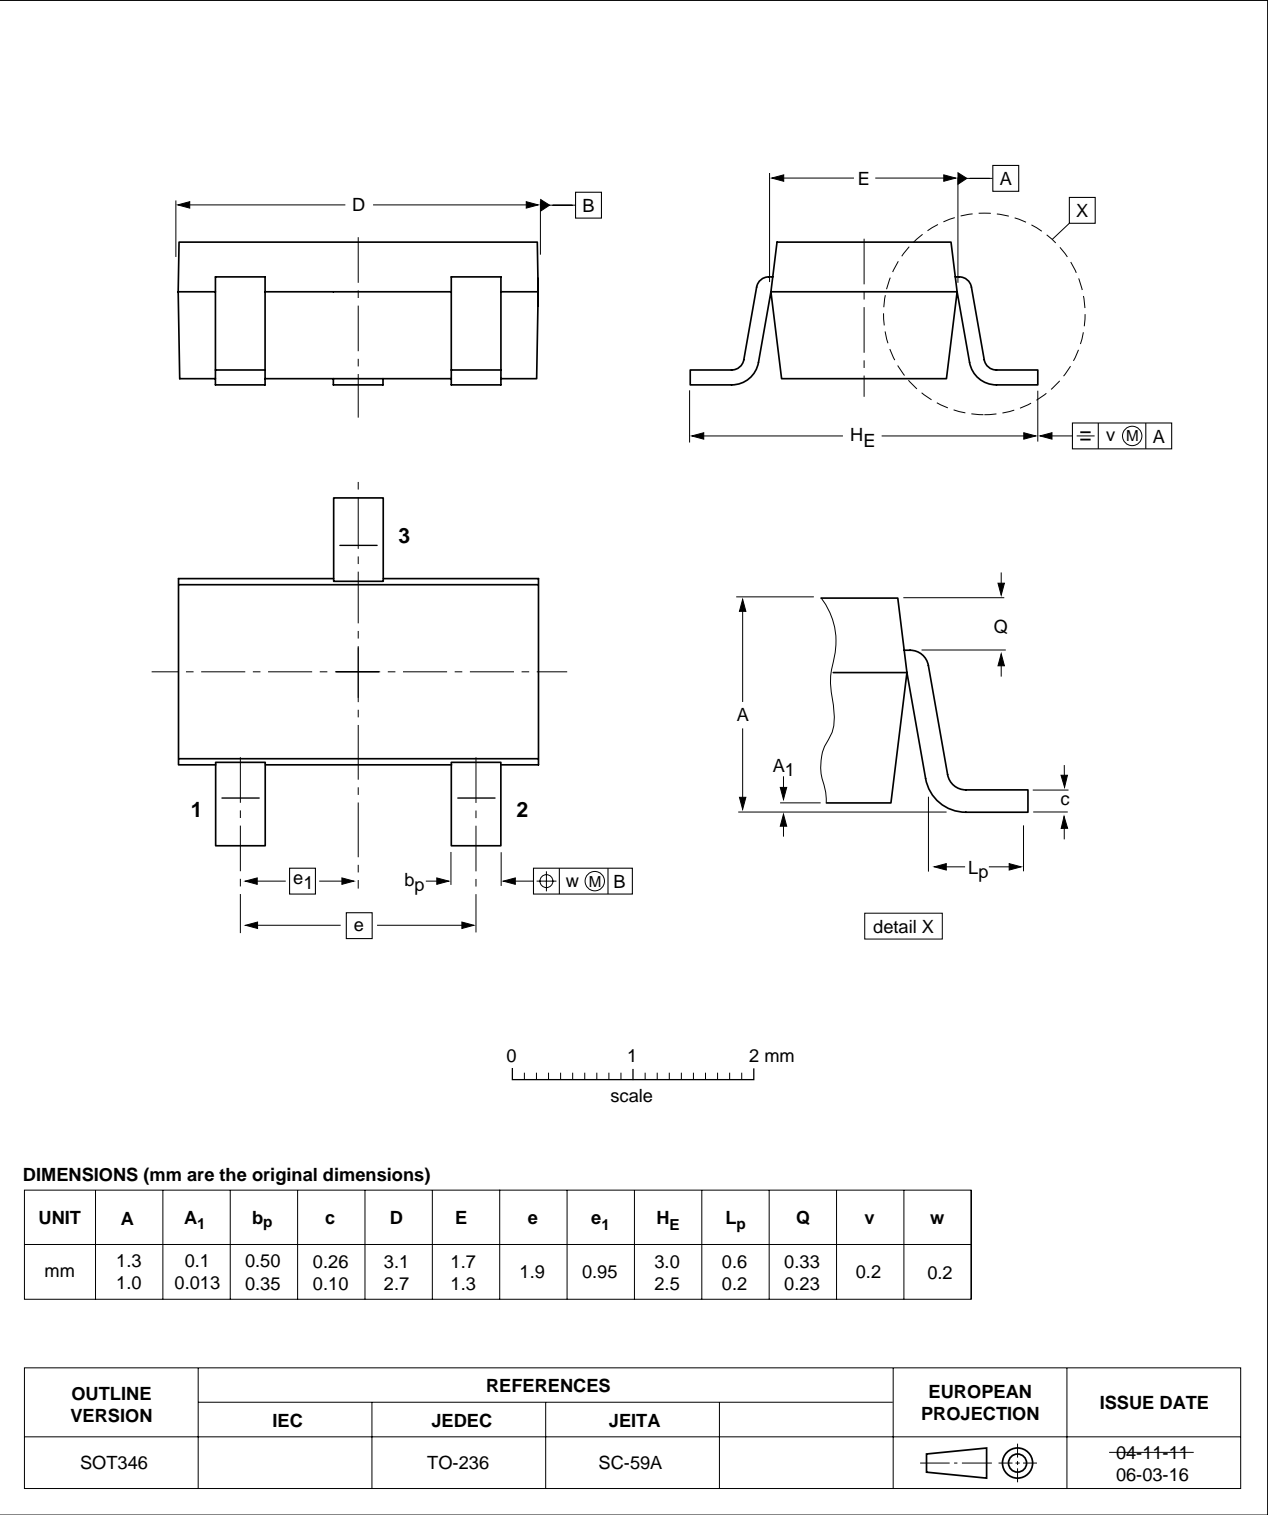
Package outline SOT346 (SC-59A/TO-236)
